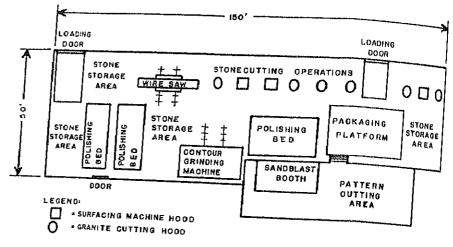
Floor plan of typical granite cutting shed employing about 25 persons. (1955.)
